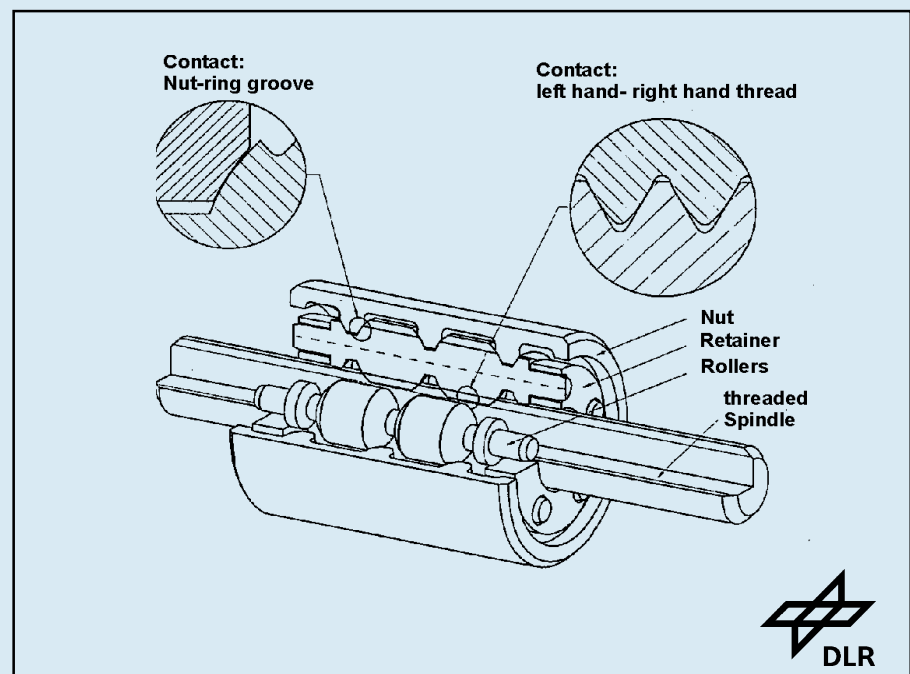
Design example with fine pitch threads on spindle and rollers, and coarser pitch circular grooves between rollers and nut for high gear ratio. This type of differential roller screw was used in the gripper of the ROTEX robot flown with the NASA D2 Spacelab mission.
